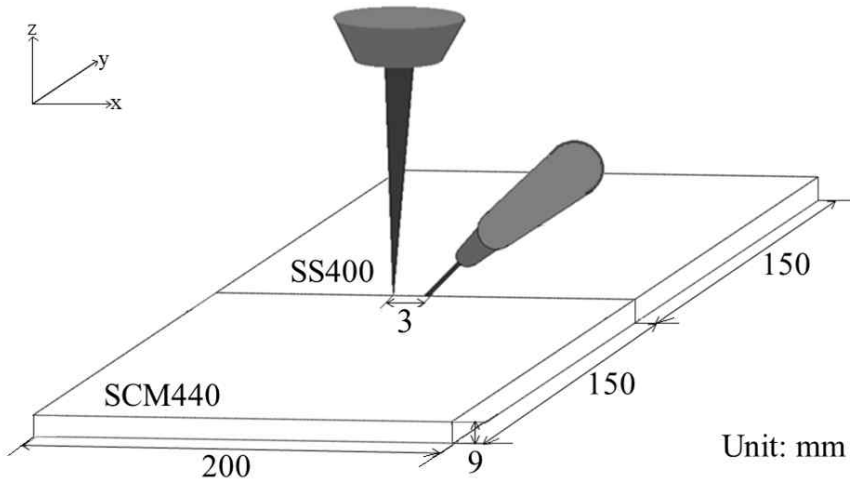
Configuration of laser-arc hybrid welding
